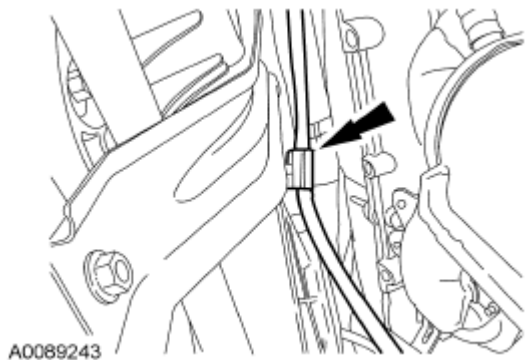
Locating Heated Oxygen Sensor (HO2S) Wiring Retainer
